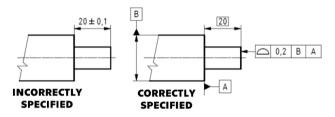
Example of improperly specified distance and its correct specification (marking) using geometric tolerancing (in accordance with ISO GPS) – planar workpiece.
